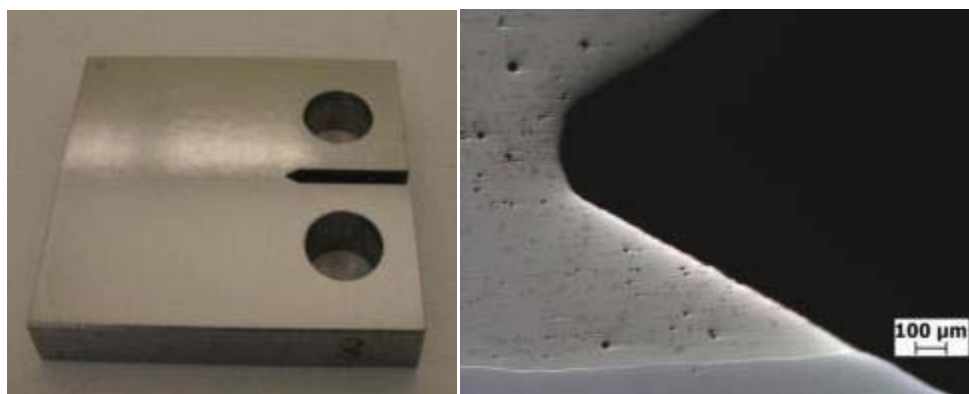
a) Image of a HT-9 to MA-754 PRW crack test specimen after polishing with a 6 μm diamond slurry. The specimens were machined using a wire EDM technique to give precise crack tip geometry (shown by the SEM image of (b)) and a high tolerance mechanical test specimens. Notice the position of the joint relative to the crack tip.
